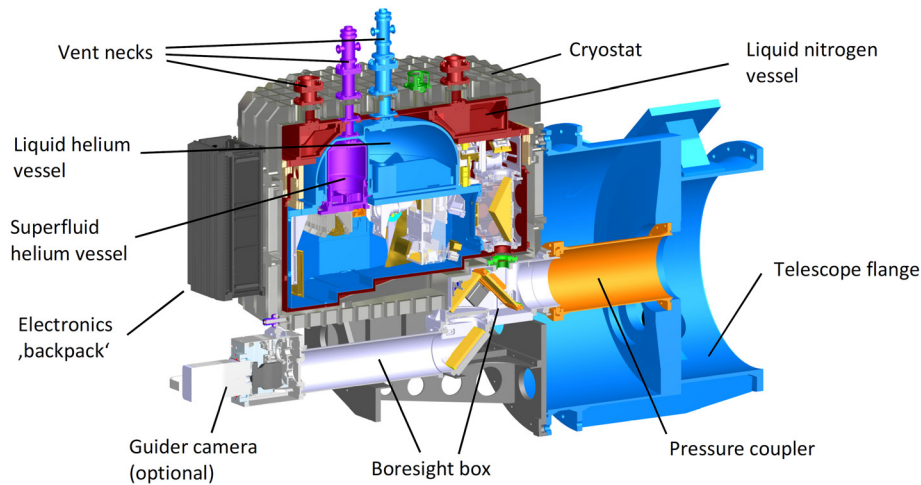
CAD drawing of the FIFI-LS cryostat attached to the SOFIA telescope flange.¹
